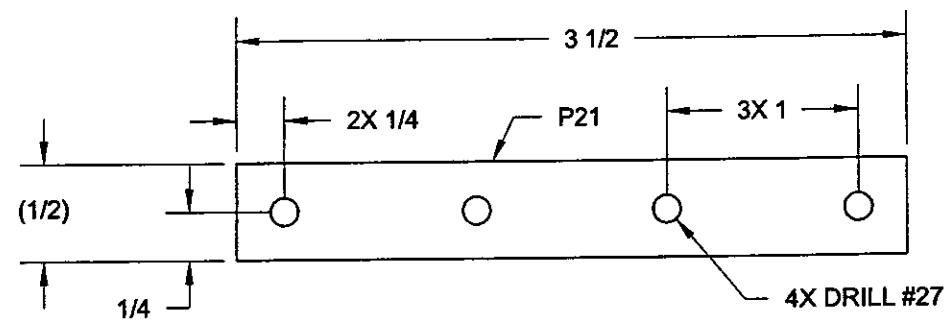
FABRICATING CIRCUIT BREAKER BUSS BAR
